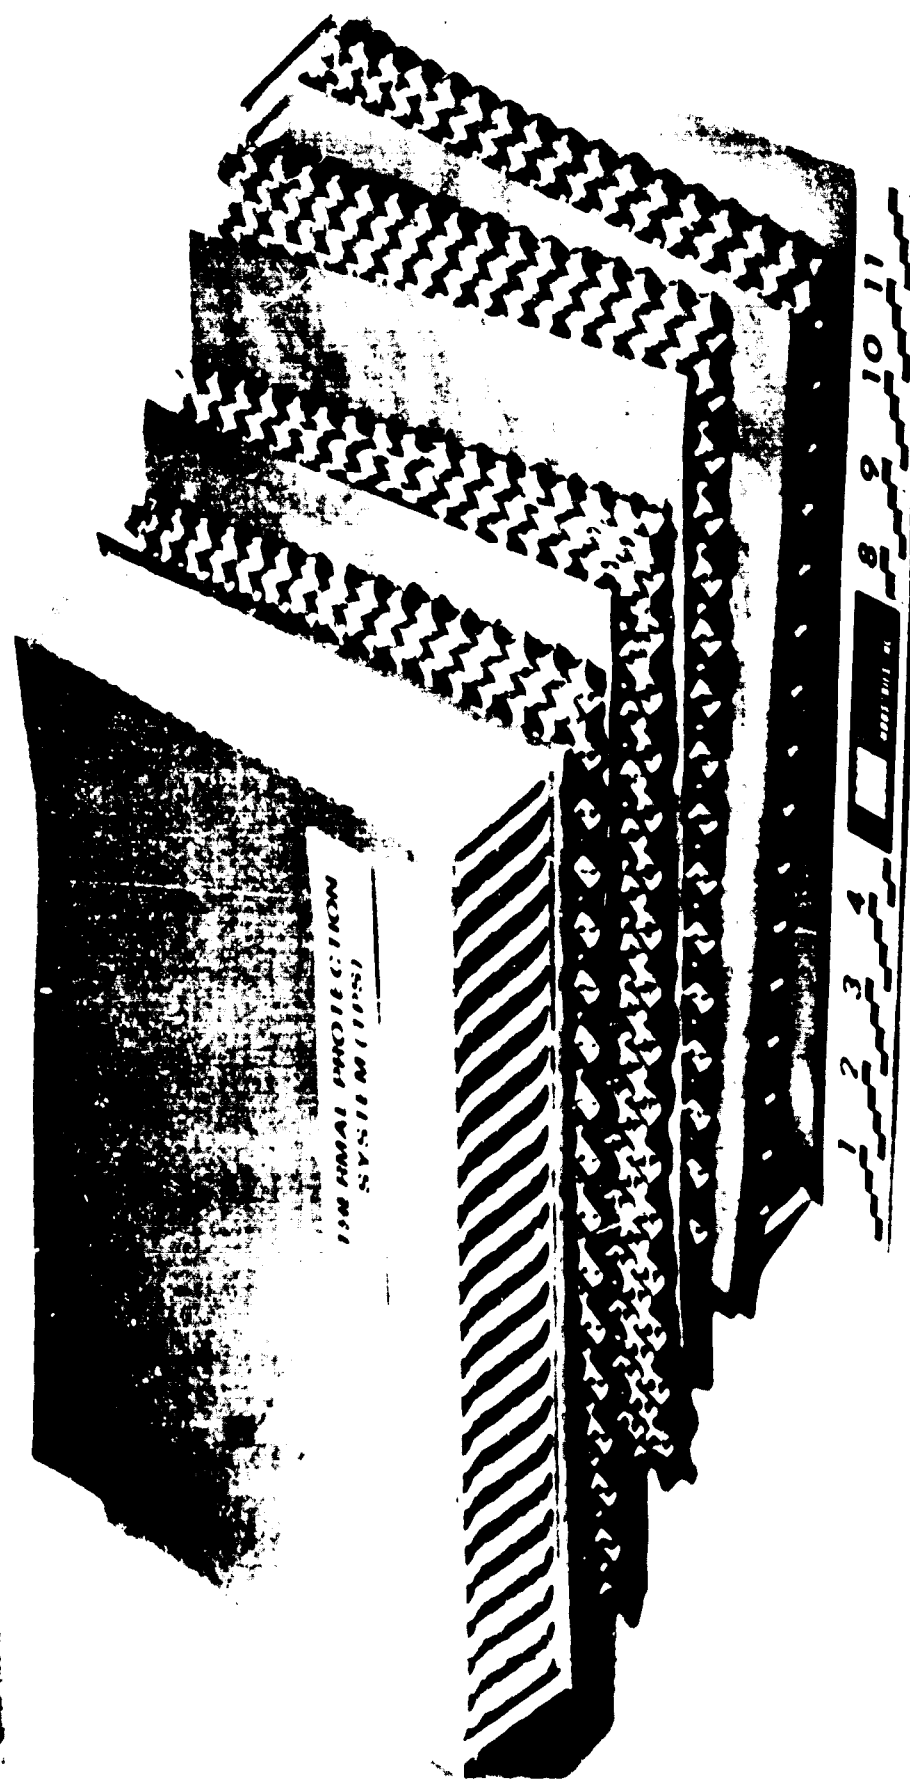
Dimpled Sheets, Septum Sheets and Skins Prepared for Assembly (Ready for Layup and LID Bonding)
